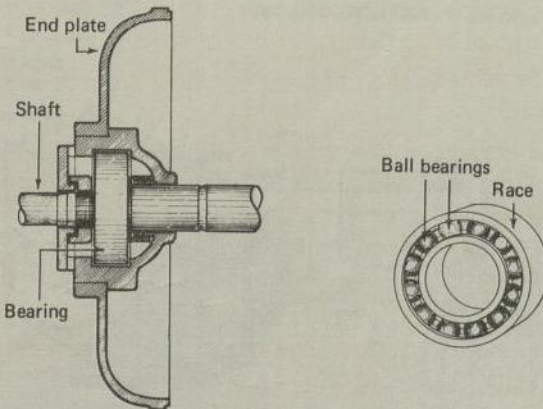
The ball bearing at right mounted in the end plates as shown.
